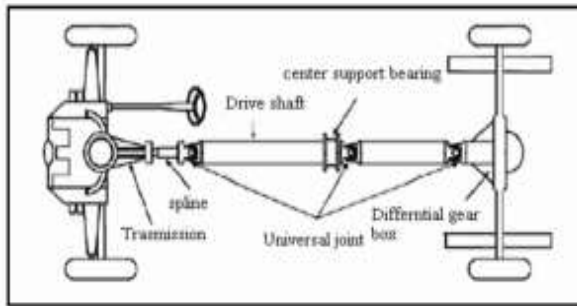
Conventional two-piece steel drive shaft for a rear wheel drive vehicle
